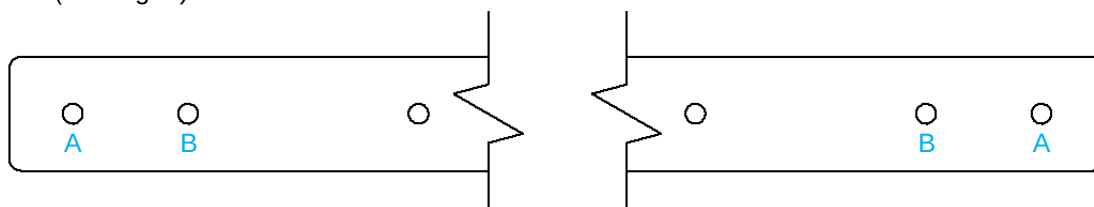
(Belt tension adjusting – holes "A" and "B")
